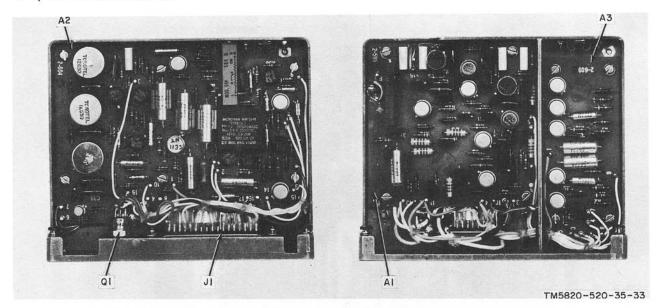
Transmitter IF and audio module 1A5, parts location.
